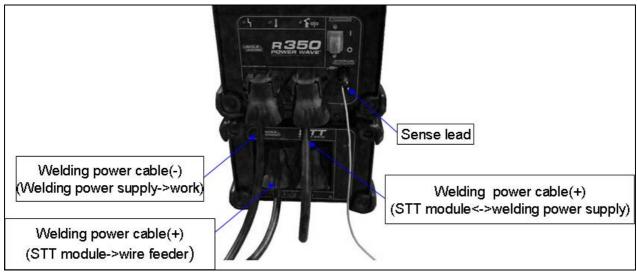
(t) Connection of ROBOWELD iC/H3 (Power Wave R350) and STT module (2/3)
